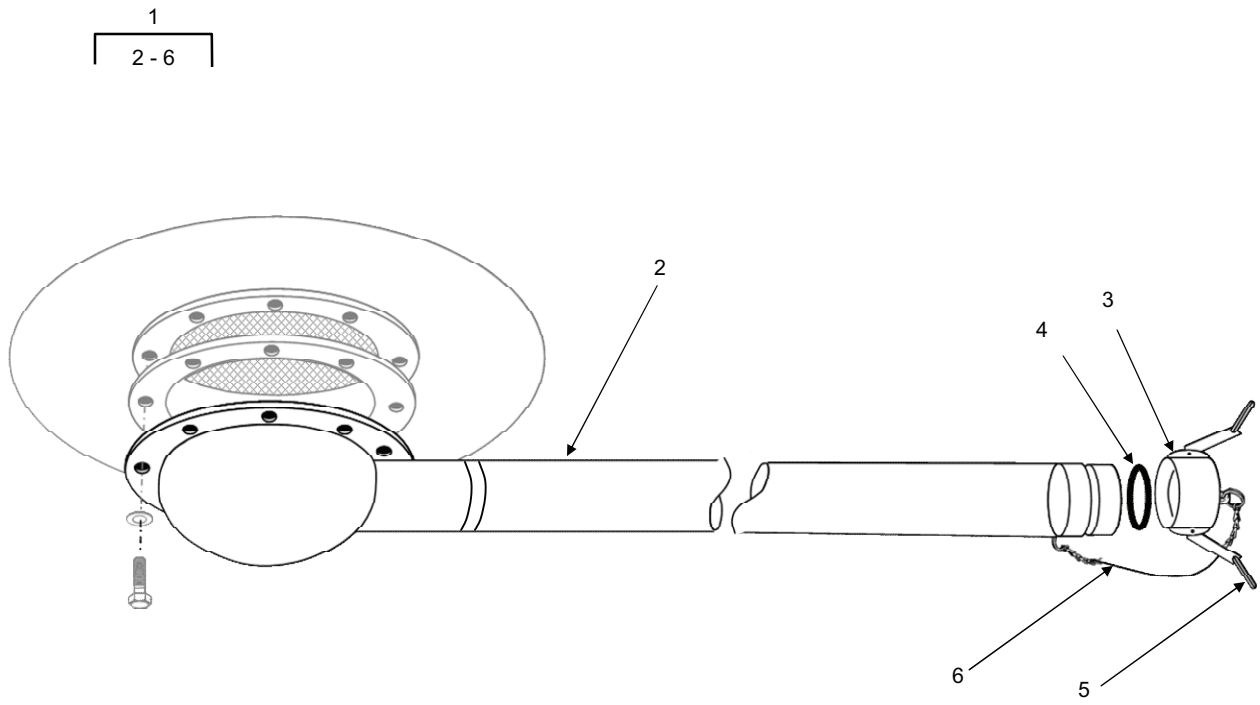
Berm Liner Drain Hose Assembly, Bowl x Cam.
